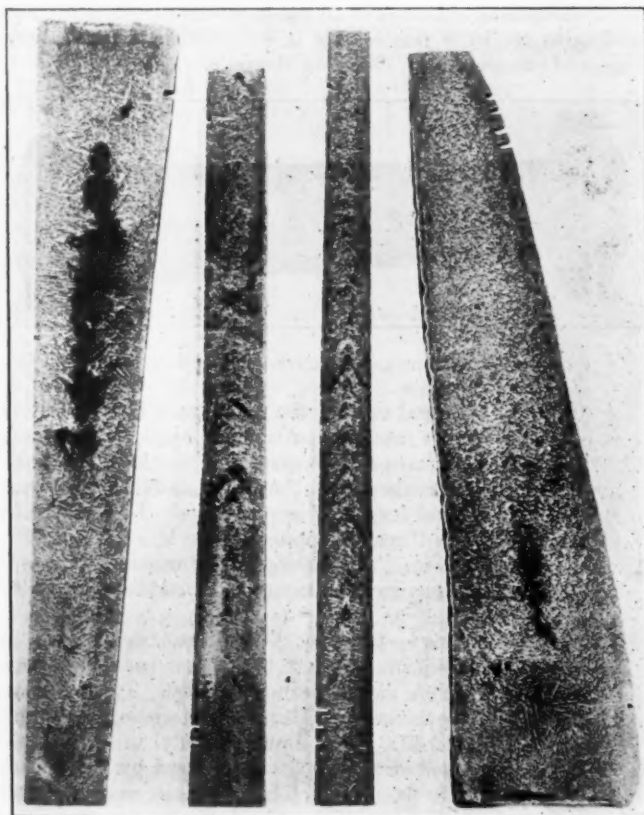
ARROWHEAD FLAWS (ETCHED SECTION), SLIGHTLY REDUCED
